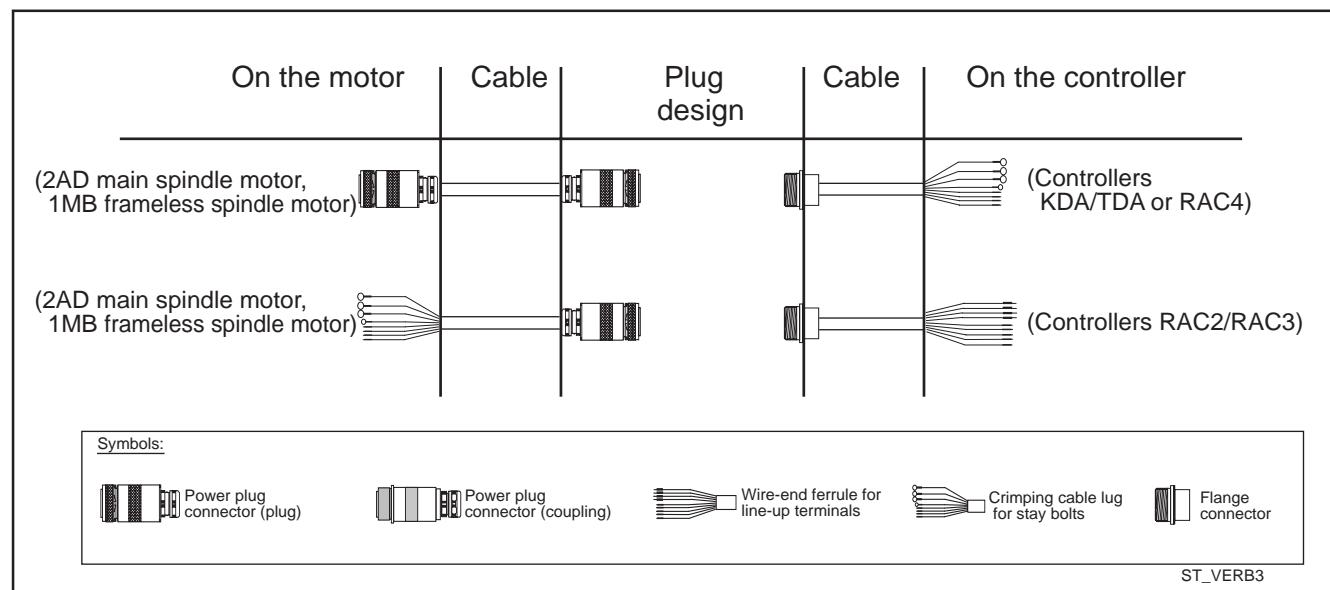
Assembled power cable with plug design (also see Figs. 2.21 and 2.22 for 2AD, see Figs. 2.28 through 2.30 for 1MB).
